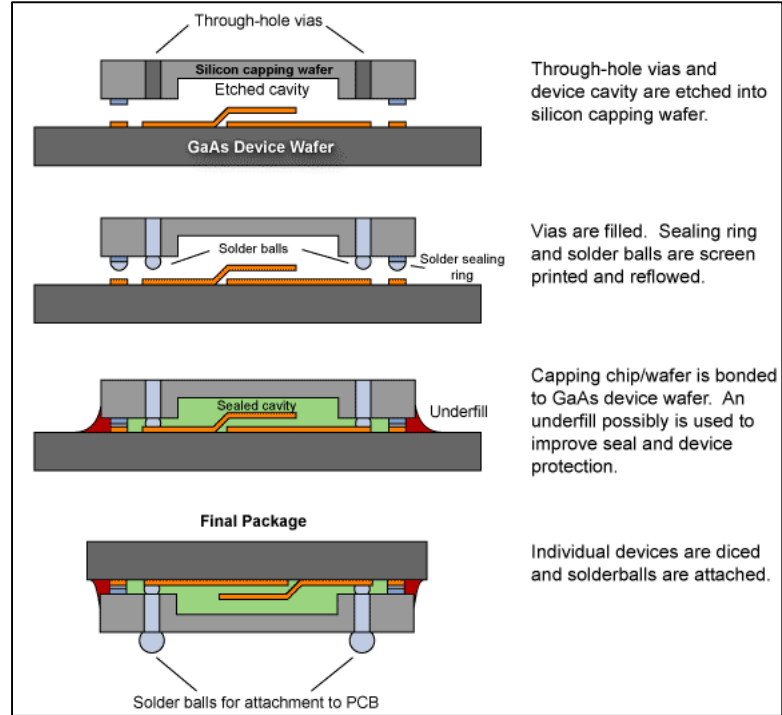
(b): A Schematic of Modified Approach for Wafer Level Chip-scale Packaging of RF-MEMS and Related Microdevices for Attachment to Printed Circuit Board (PCB)
